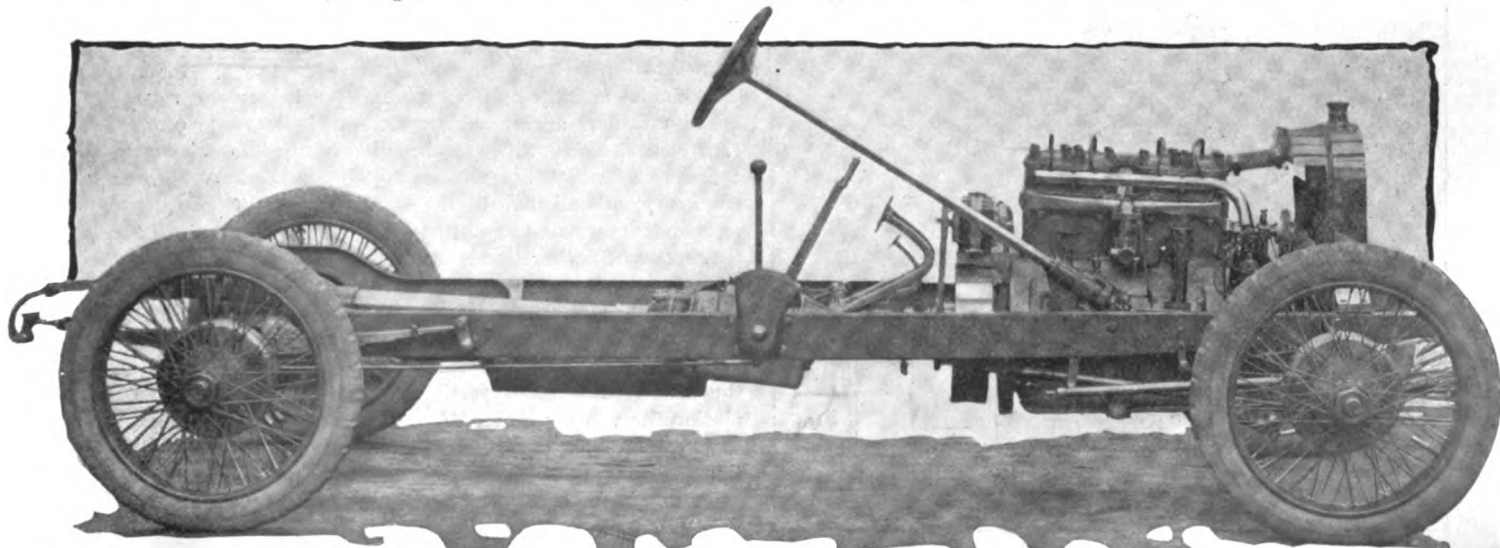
Chassis of the 25-horsepower Argyle. Note the simple exterior of motor given by sleeve valve construction
